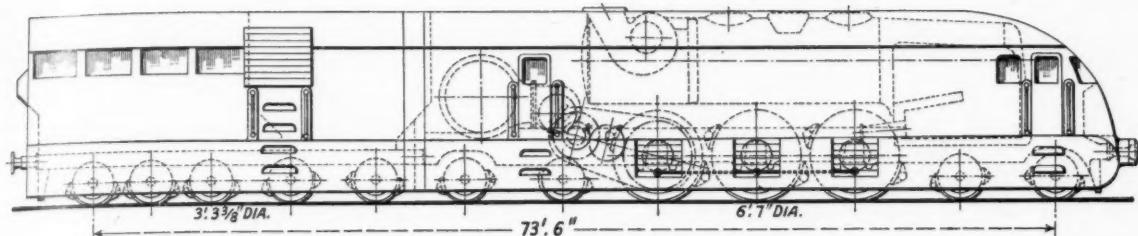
High speed design having a La Mont type boiler with forced circulation (313 lb. per sq. in.)
